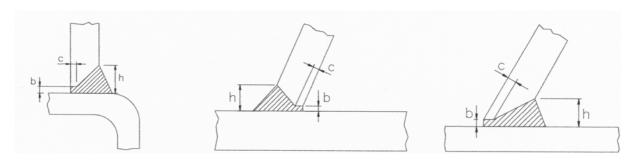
Weld preparation and fit-up Fillet welds in circular hollow section brace to chord joints
